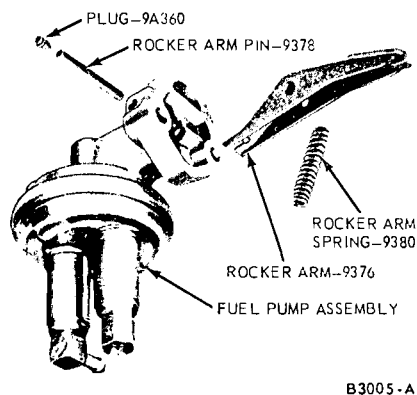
Carter Fuel Pump for 6-Cyl Engines
